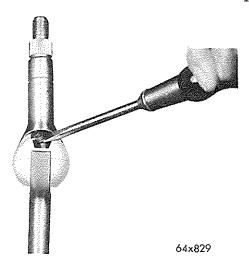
Removing or Installing the Actuator Housing Support and Lock Plate
